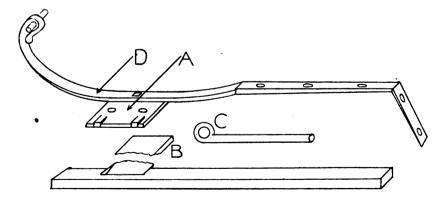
SHOWING METHOD OF FORMING PUMP HANDLE.
